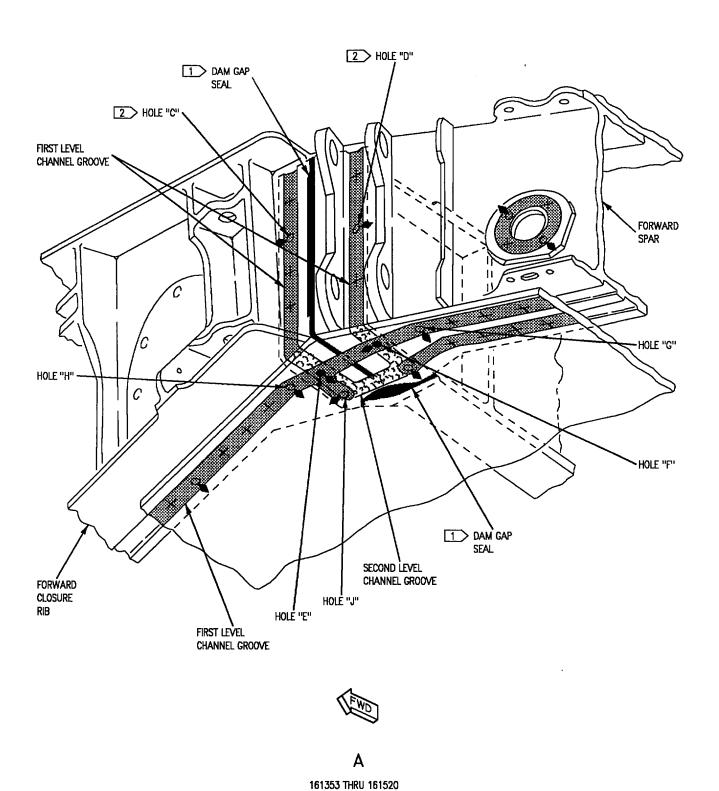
Kick Rib Channel Groove Seal Injection (Sheet 2)
